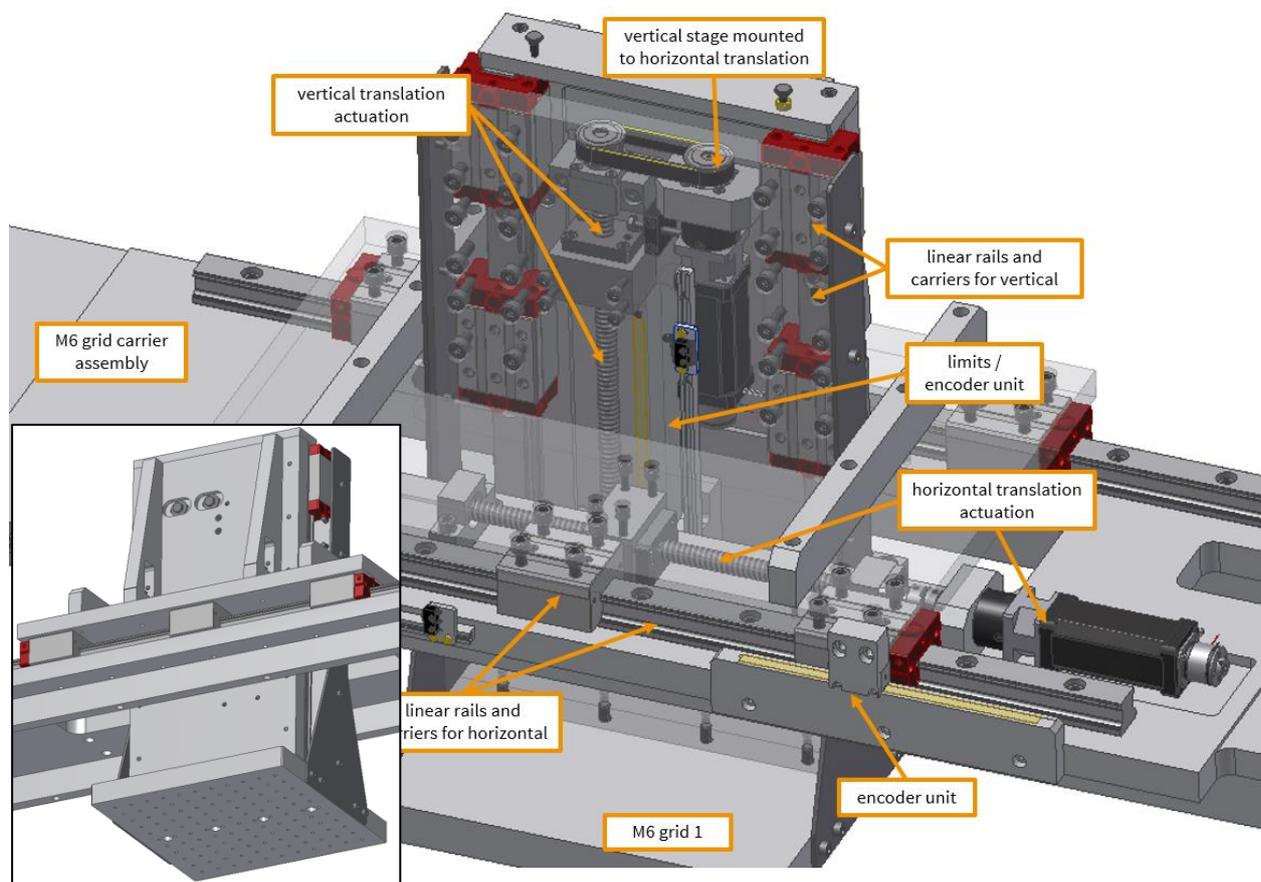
Layout of the M6 grid assembly with its x-y-translation table (lower left: view from bottom on grid)
